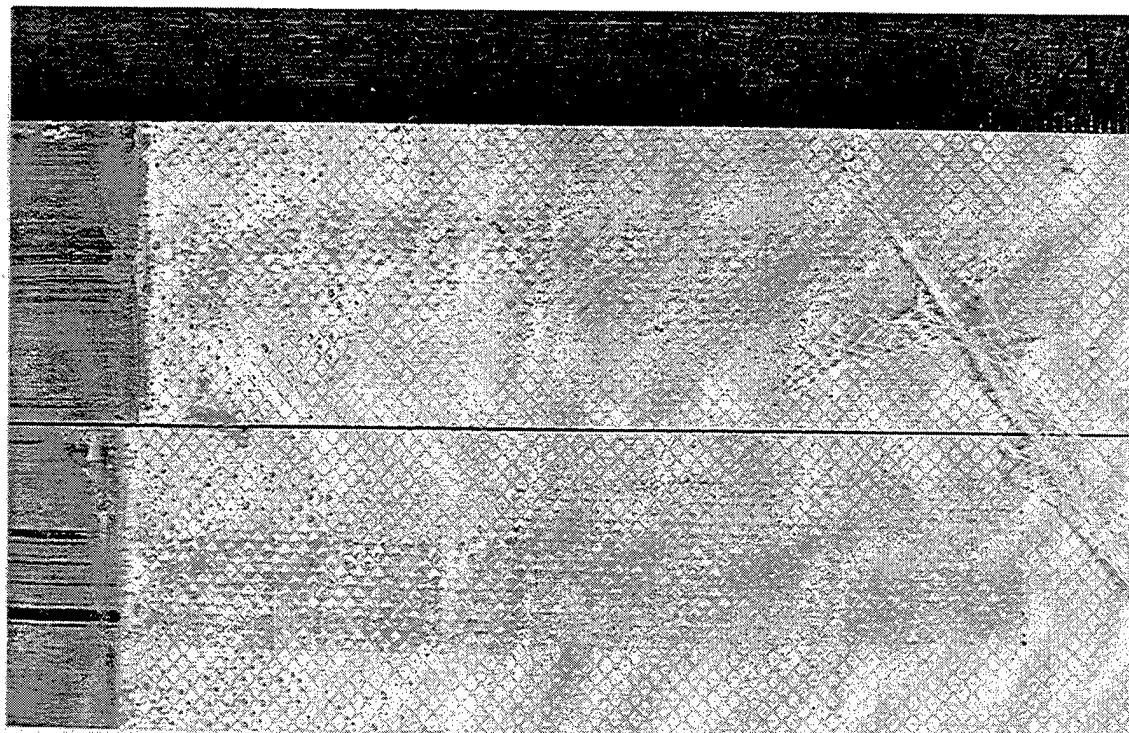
Photograph Of Wedge Specimen Fracture Surface Of PAA And Primed Aluminum Alloy 2024-T3.
